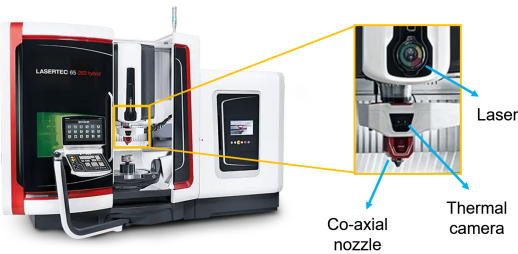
LASERTEC 65 DED hybrid machine [19].
